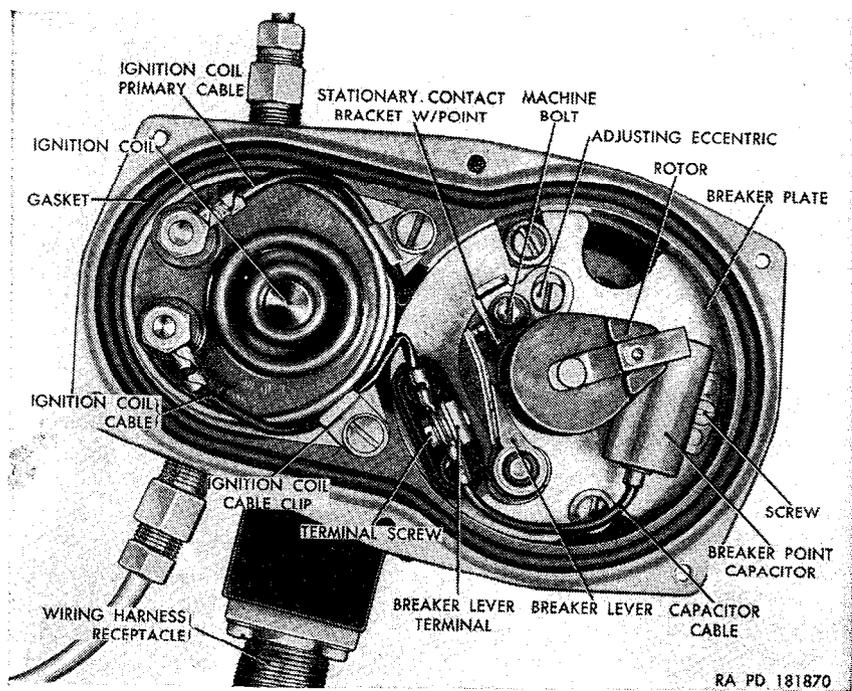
Distributor with coil assembly—cover and cap assemblies removed.
